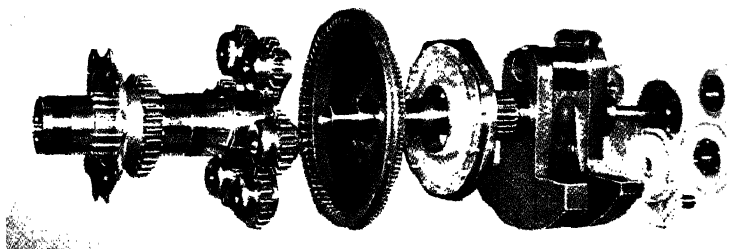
The Wright "Cyclone" (G.100) crankshaft arrangement showing concentric airscrew reduction gear on left and accessory drive gears on right. The components are shown separated for clearness.
